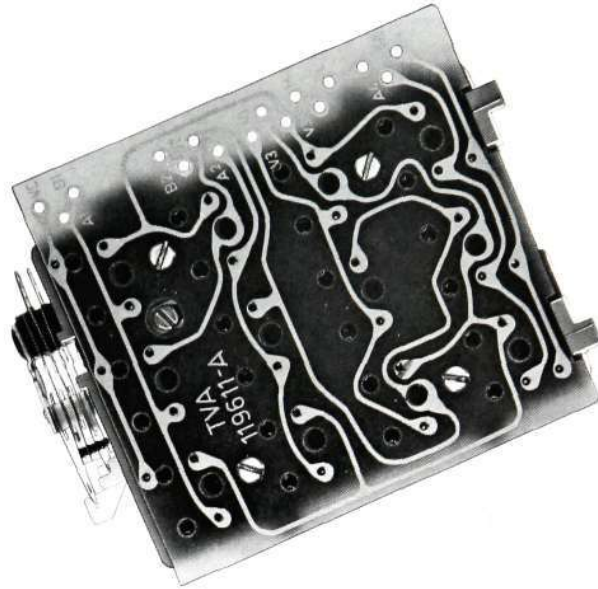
shows the underside of the keyset with the contact strips and their V-shaped contact positions, the cylindrical contact and the terminations of the contact springs which in the complete keyset are soldered to the printed board. It will also be seen that the common springset is fitted to a sliding support for ease of adjustment.
